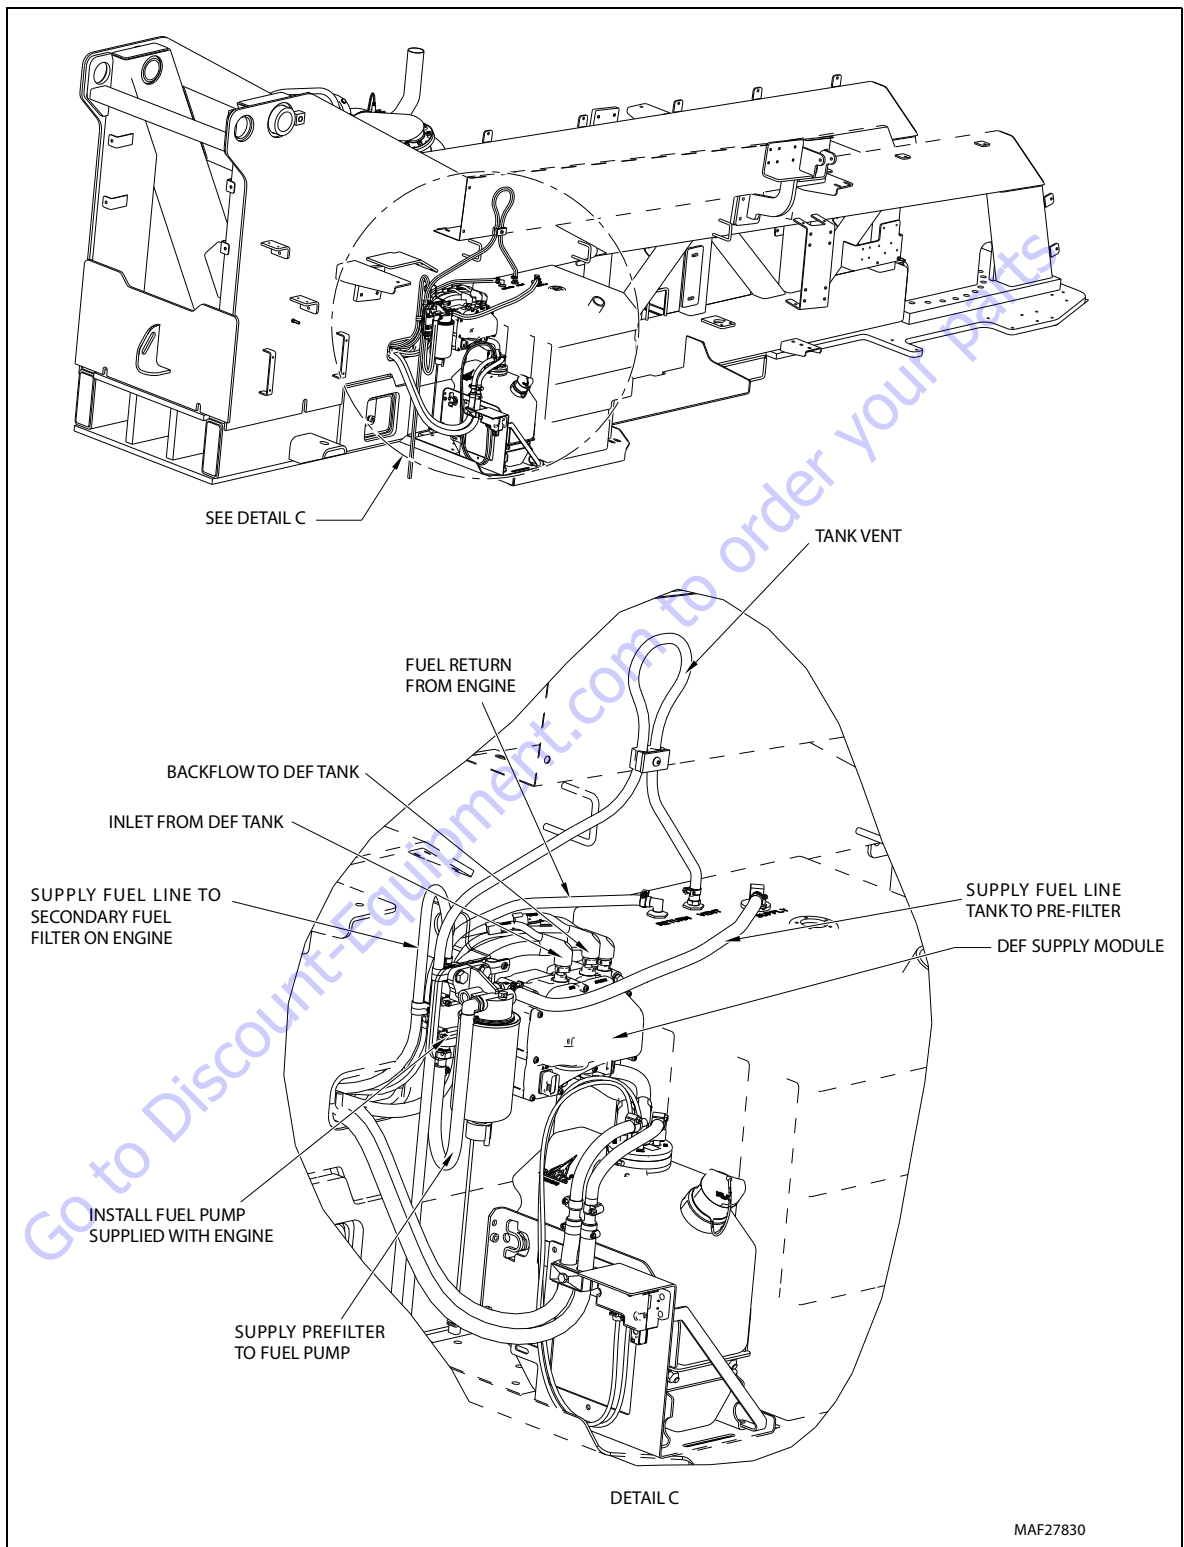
Engine Installation and Diesel Exhaust Fluid (DEF) System (T4F & Stage IV) - Sheet 2 of 6
